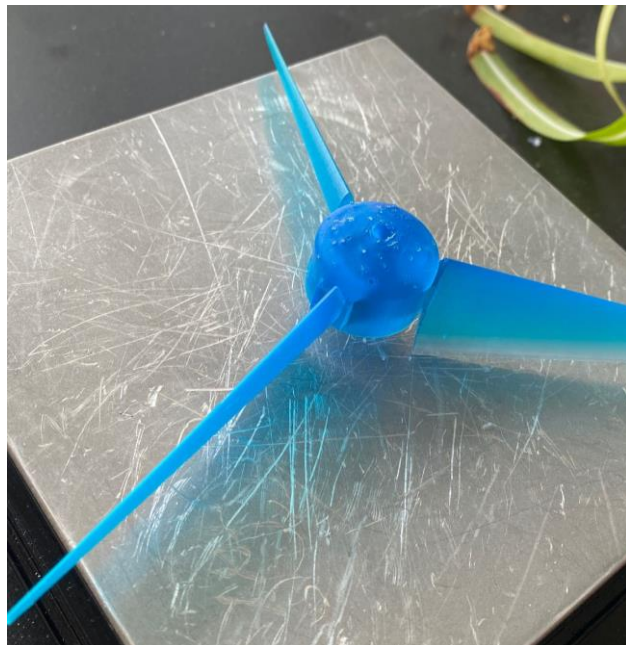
Assembled resin turbine with solid blades (no slit) and a smaller hub
